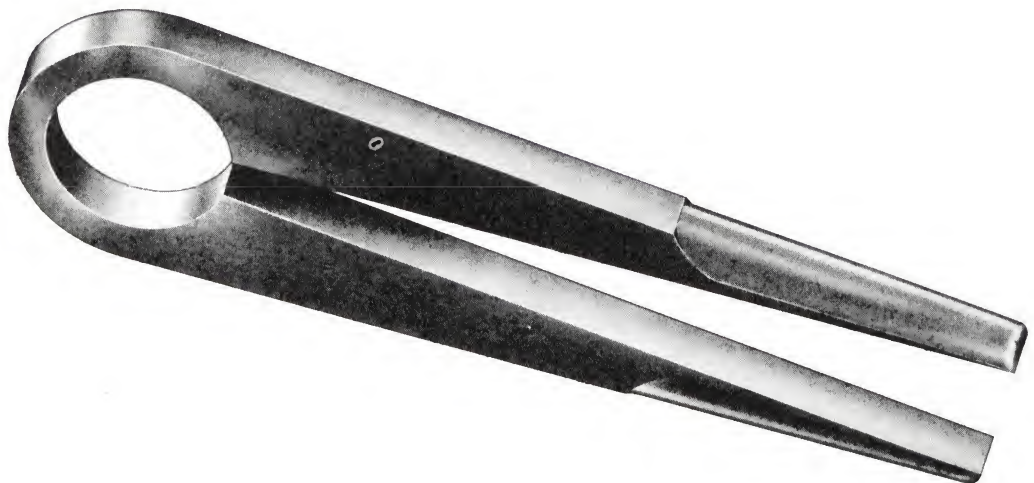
2.75-Inch Rocket Spanner Wrench.
